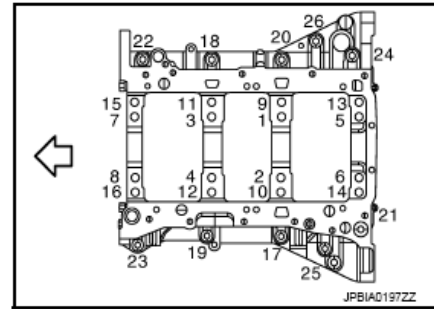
Identifying Lower Cylinder Block Bolts Tightening Sequence
